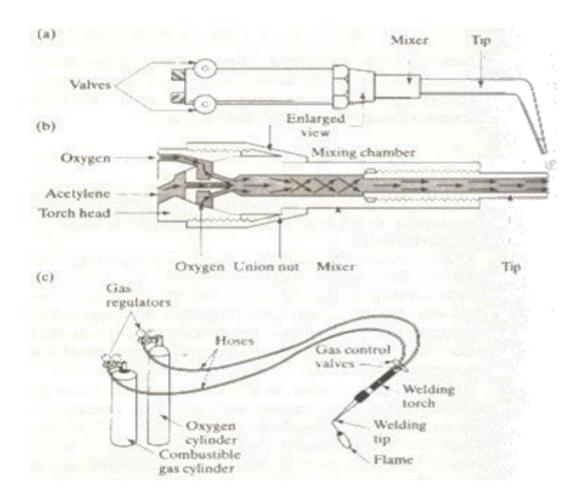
Gas Welding Equipment And Mixing Mechanism
